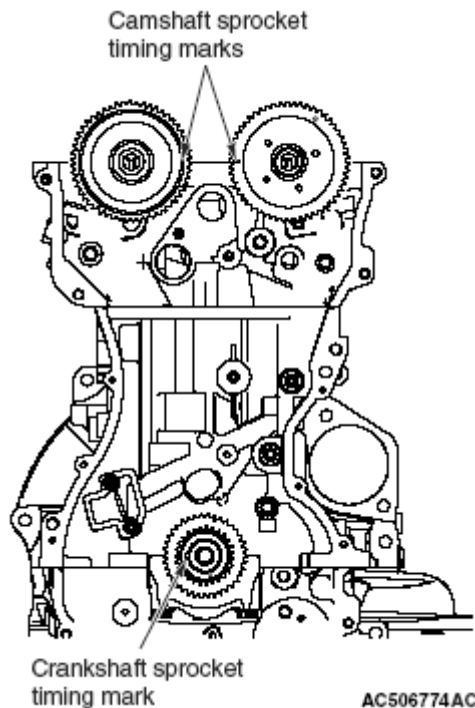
Identifying Camshaft And Crankshaft Sprocket Timing Marks
